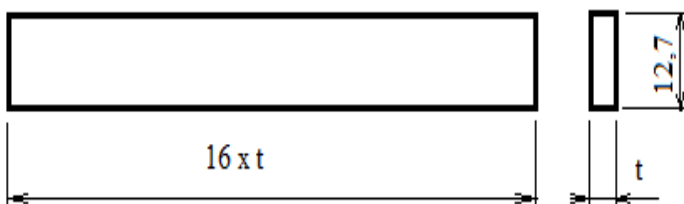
Dimensions of the ASTM D790 bending test specimen
